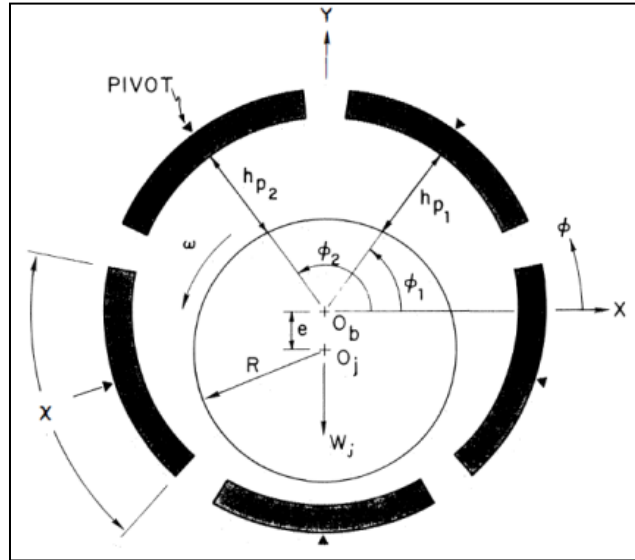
39 Tilting Pad bearing Pivot film thickness [8]
